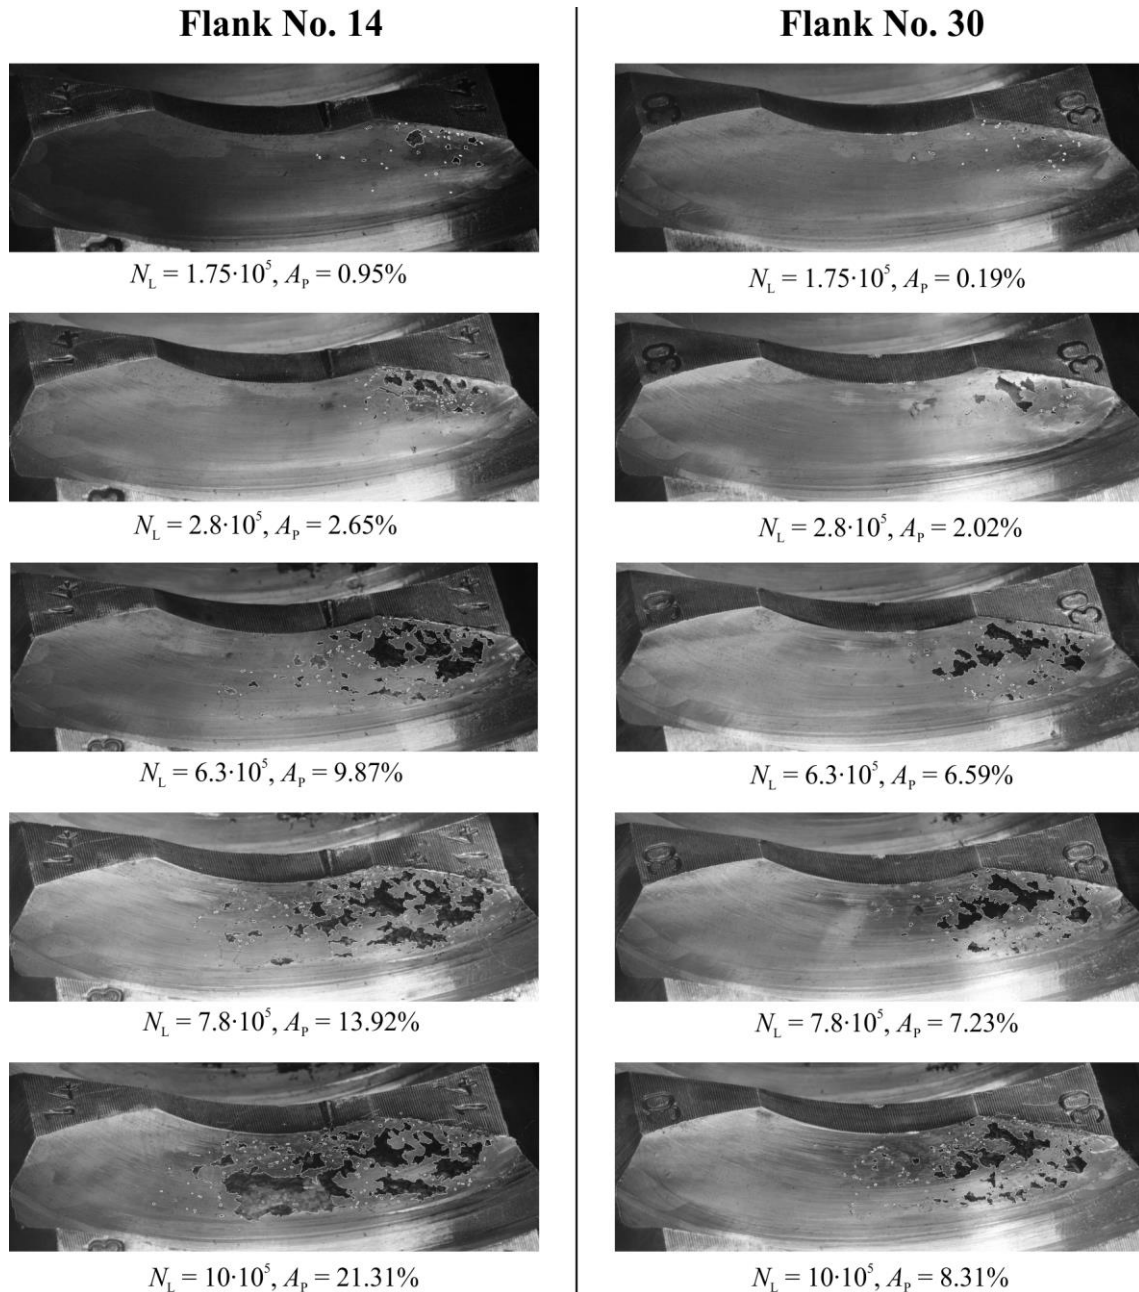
Pitting formation and development on AlSn6 worm wheel flanks
